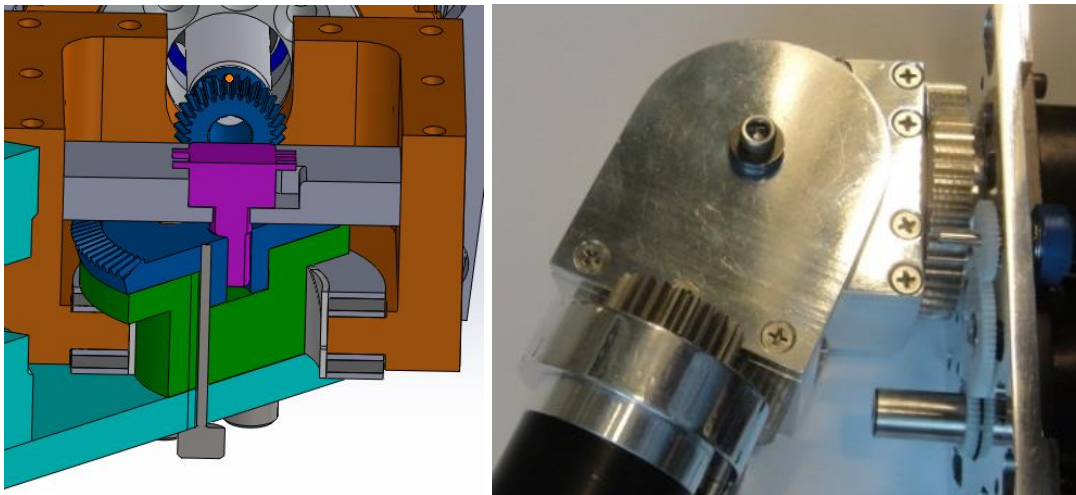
Rotated section view of assembled shoulder (left) and final assembly (right).
